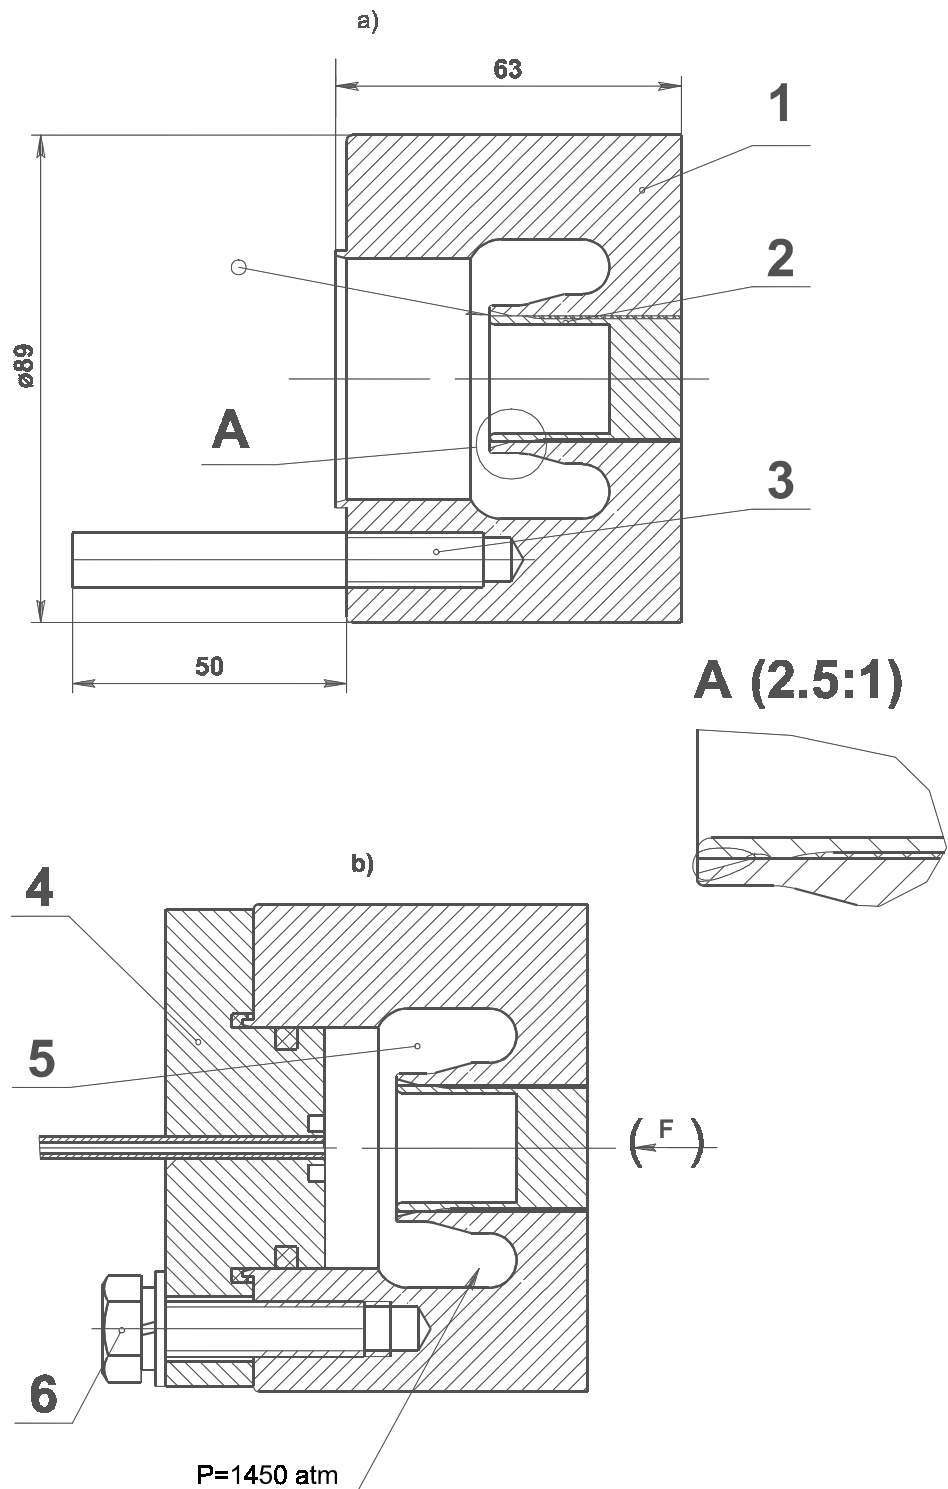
Samples for worked out welding regime (a) and for welding tested (b).
